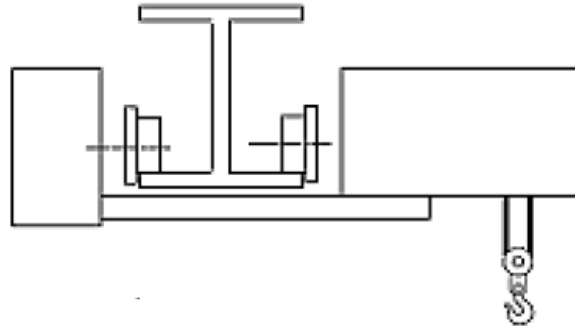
Section view of a single girder bridge crane (Treloar, 2011)
